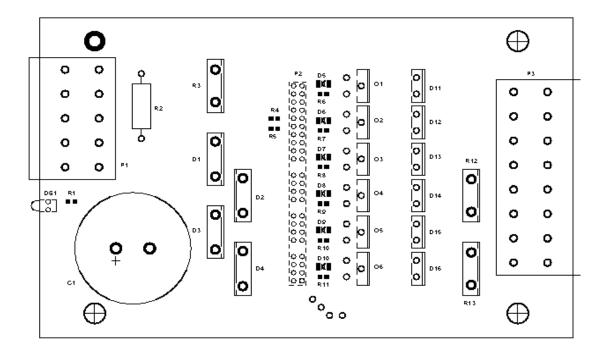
Top view of classical converter that plugs on to EVM motor interface board shown in Figure 6.
